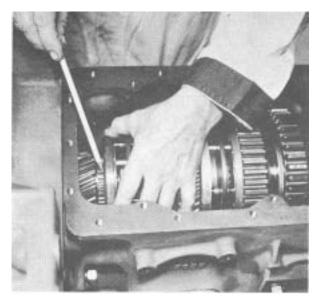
Install main drive gear assembly in transmission case. Clutching teeth on main drive gear must enter 5th speed synchronizer cup without binding.
